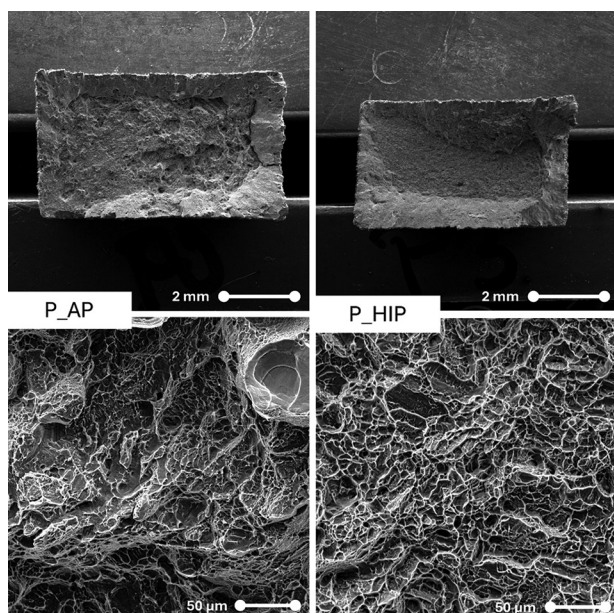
Fracture surfaces of LPBF-produced porous samples before and after HIP treatment. Corresponding high-magnification details of the fracture surfaces are shown below each main image, demonstrating the typical differences in fracture morphology, pore distribution, and surface roughness caused by the HIP
